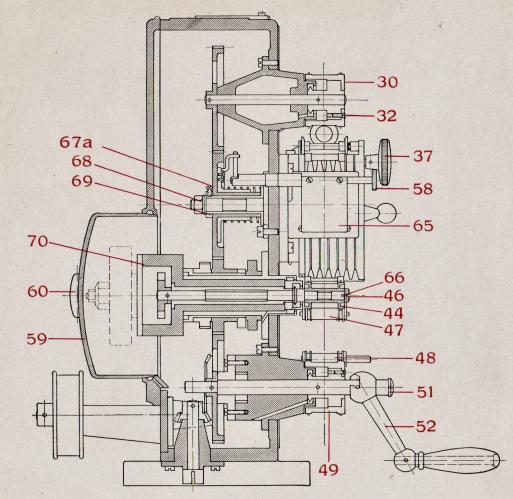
PLATE VI Section through the Mechanism - View towards the screen For Ernemann II only
